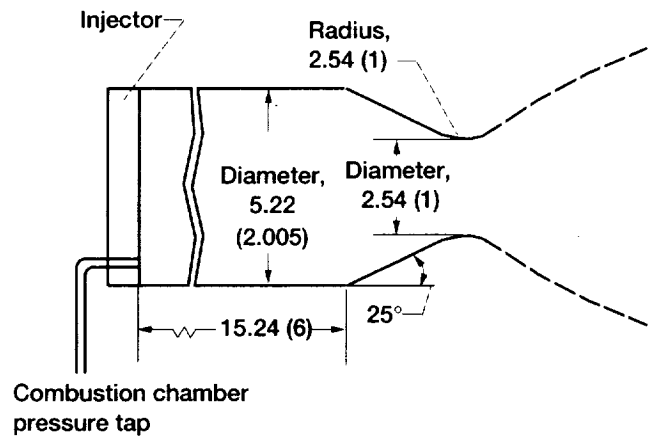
Schematic of rocket combustion chamber. All dimensions in inches (centimeters).
